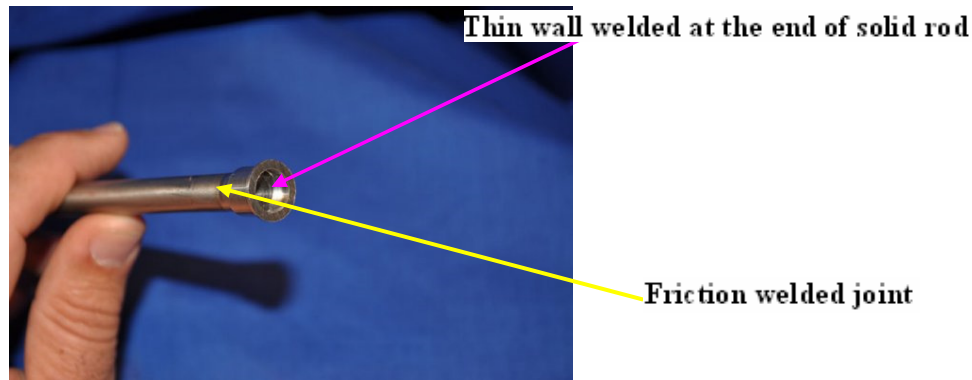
Friction welding of thin wall at the end of solid rod ^[8]
